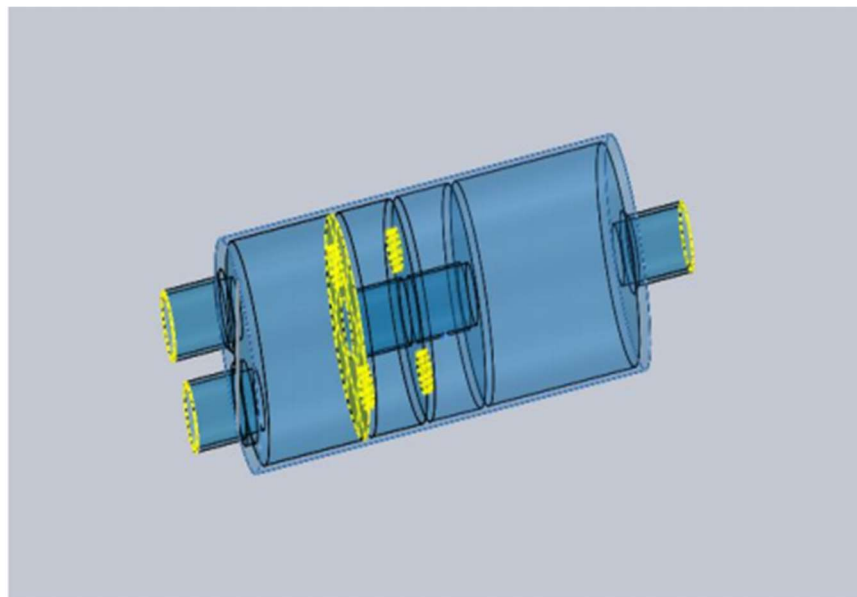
Isometric view of the circular cross-sectional muffler with dual outlet [2]
